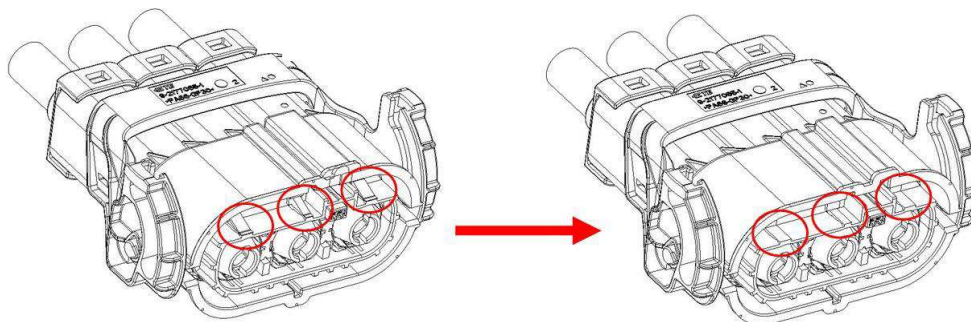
Cover assembly/ Montage Abdeckkappe
